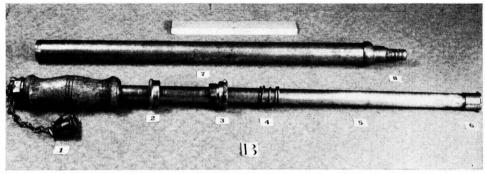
Unit "B" hand pump. (1) Interchangeable nozzle, chain not attached to freeturning ring, (2) Packing gland nut containing packing ring, (3) Packing nut, (4) Shock absorber spring, (5) Plunger, (6) Outlet valve assembly, (7) Cylinder, (8) Inlet valve assembly and hose nipple.
